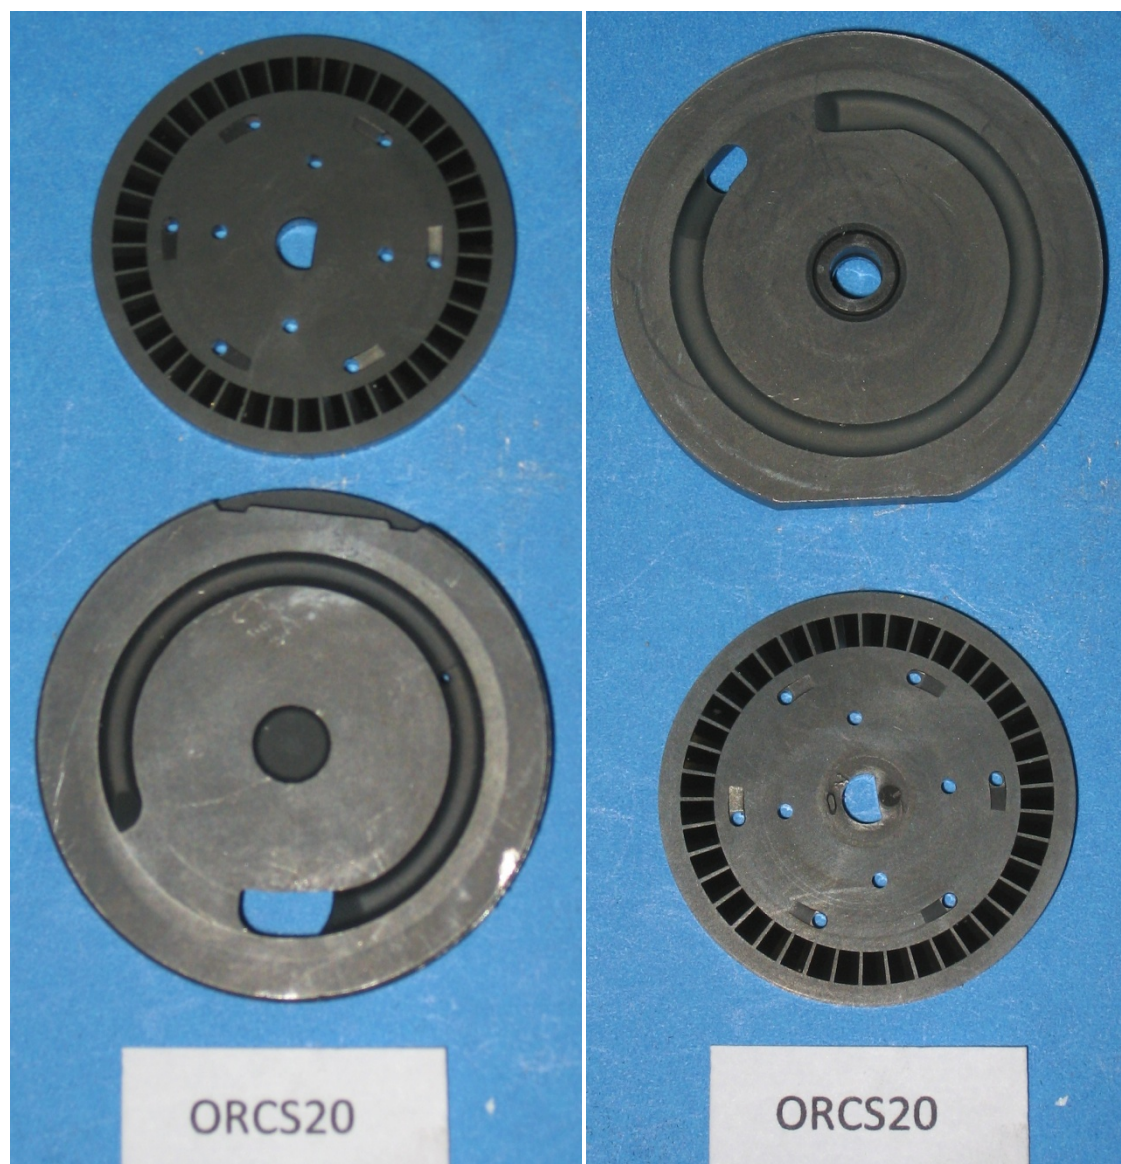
ORCS20 Fuel Pump Impeller with Inlet (Left) and Outlet (Right) Mating Cover.
